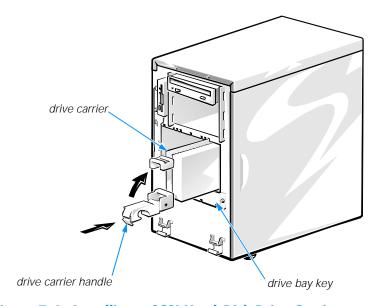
Installing a SCSI Hard-Disk Drive Carrier
